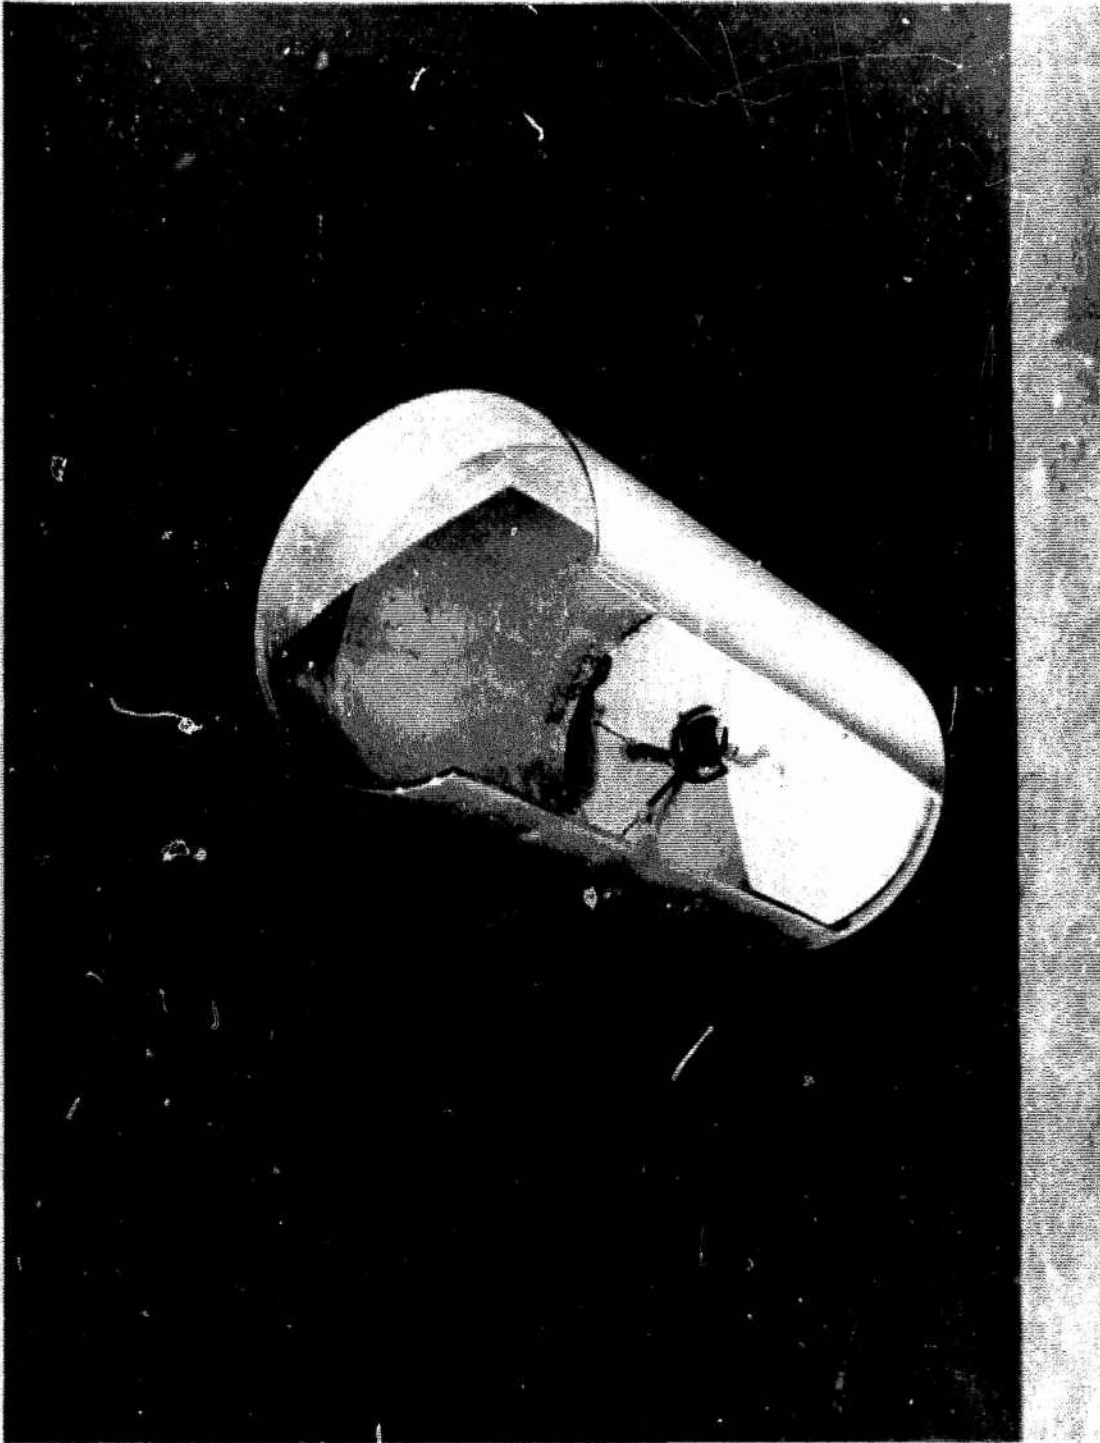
EXPOSED VIEW OF THERMOCOUPLES INSTALLED IN AN ADAPTER BOOSTER
